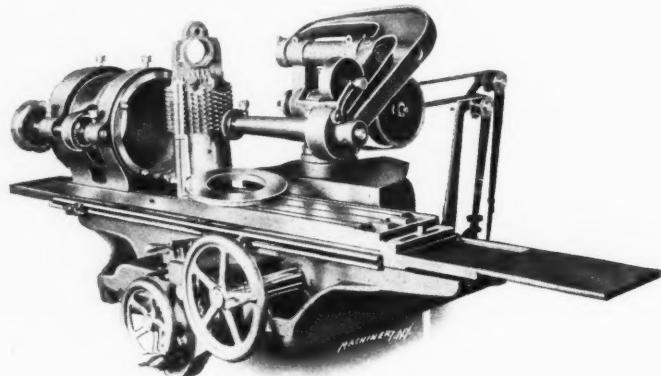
Hollow Spindle Head-stock for Grinding Automobile Cylinders in Thompson Grinding Machine.
